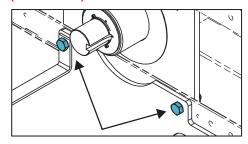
1 - 37 Check Torque on Drawbar Mounting Bracket Bolts
